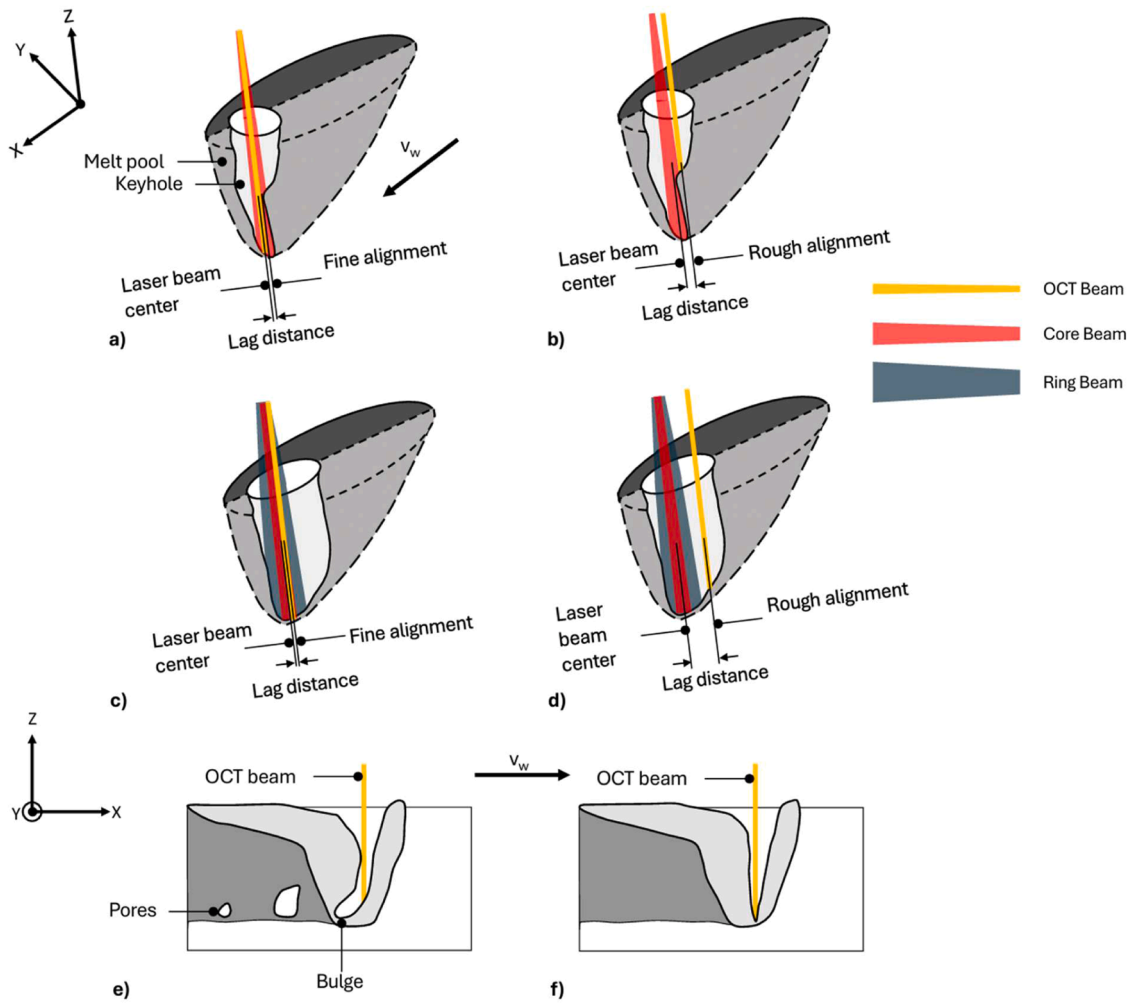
Representative sketches of a) and c) a fine alignment and b) and d) a rough alignment, for a) and b) a single-mode core beam laser weld and c) and d) a single-mode core and ring beams laser weld, e) a tilting keyhole, and f) a non-tilting keyhole.
